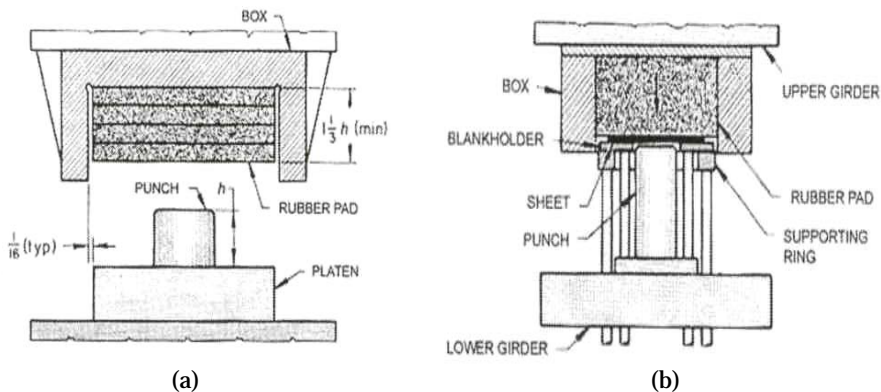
Rubber pad forming techniques: (a) Guérin process; (b) Marform process, from [27].
